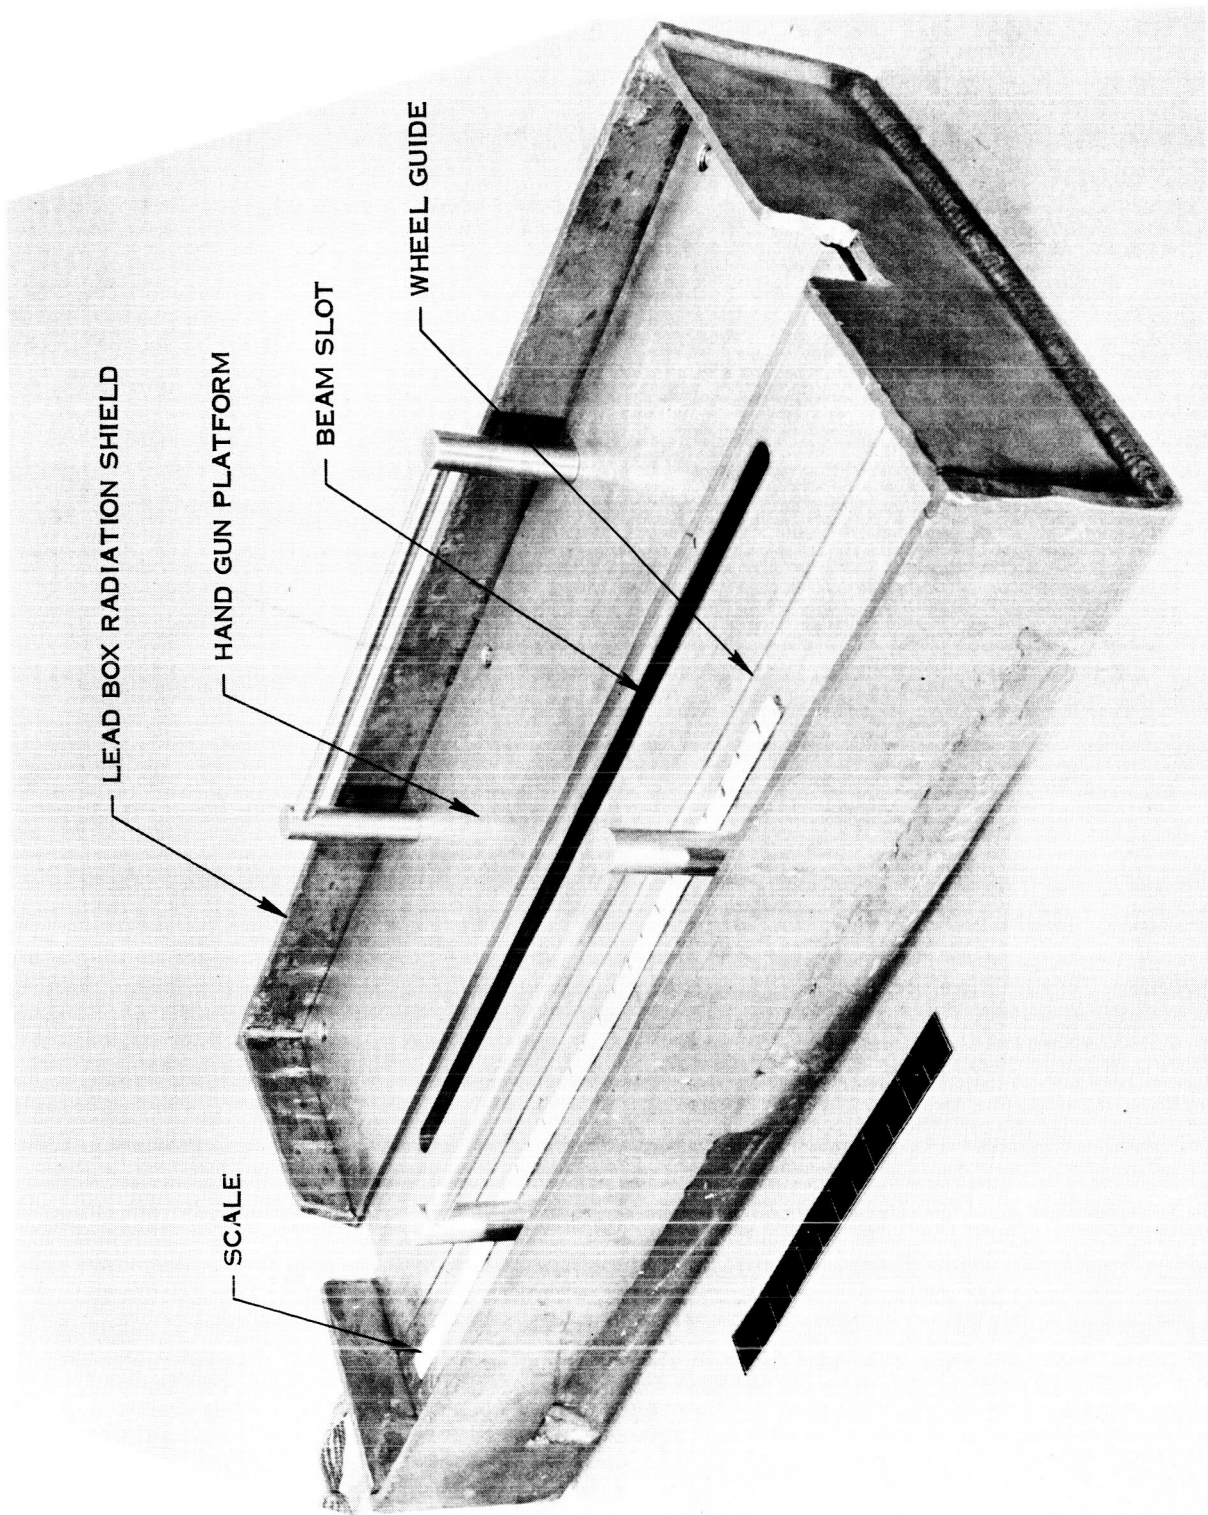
WORKPIECE FIXTURE ASSEMBLY
